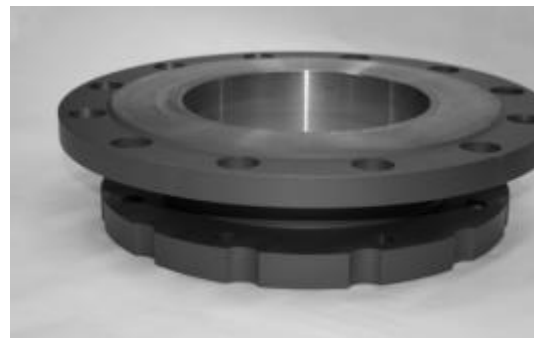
SHORTSTOPP® II plugging machine to POLYSTOPP® 10" Valve adapter
